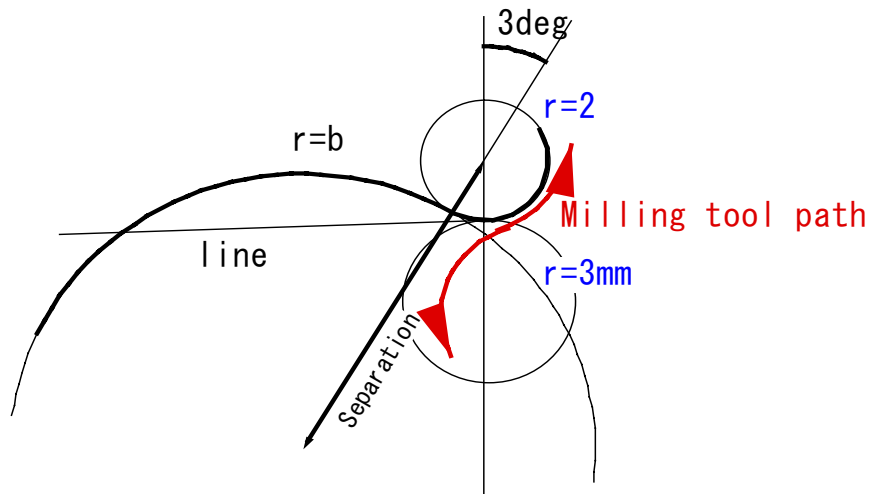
Milling tool path shown in red line for “ $2b - r2$ ”.
